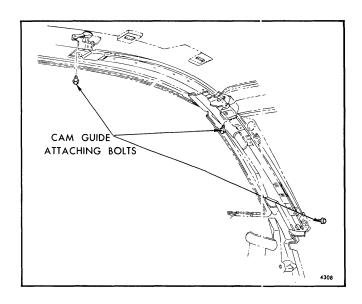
Tail Gate Window Right Guide Cam Attachment
